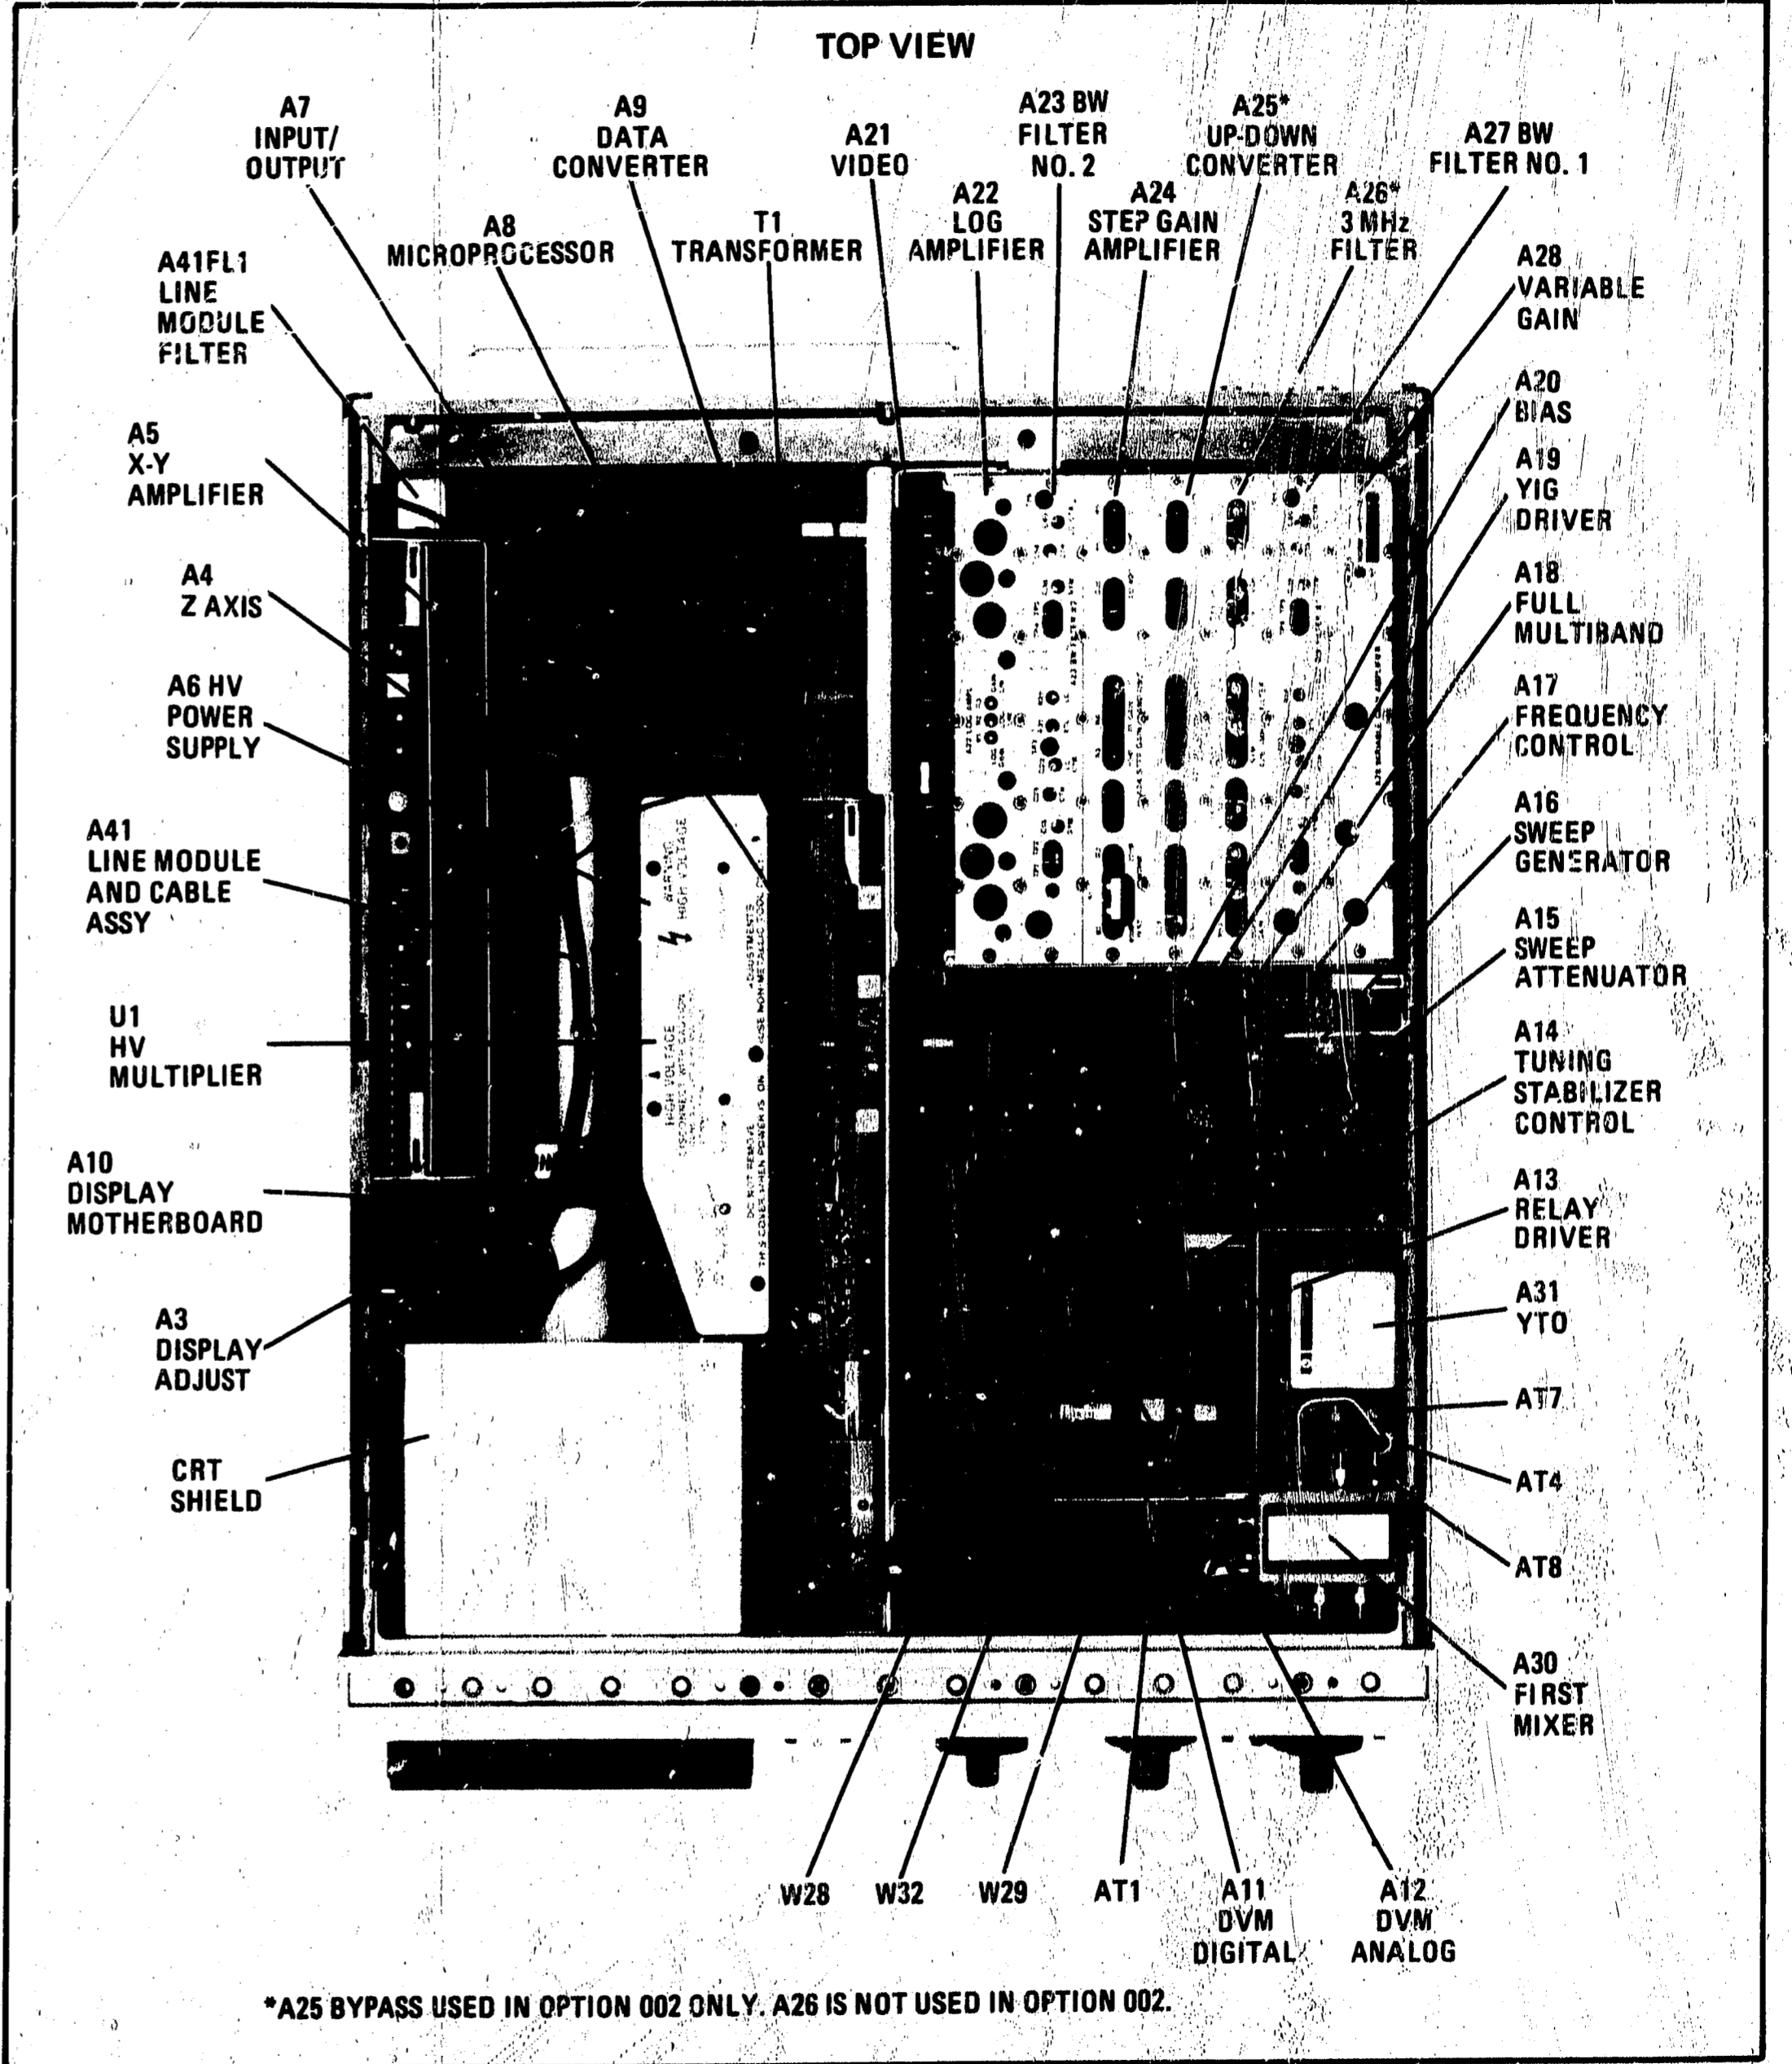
HP Model 8569A Major Assembly and Component Locations, Top View
